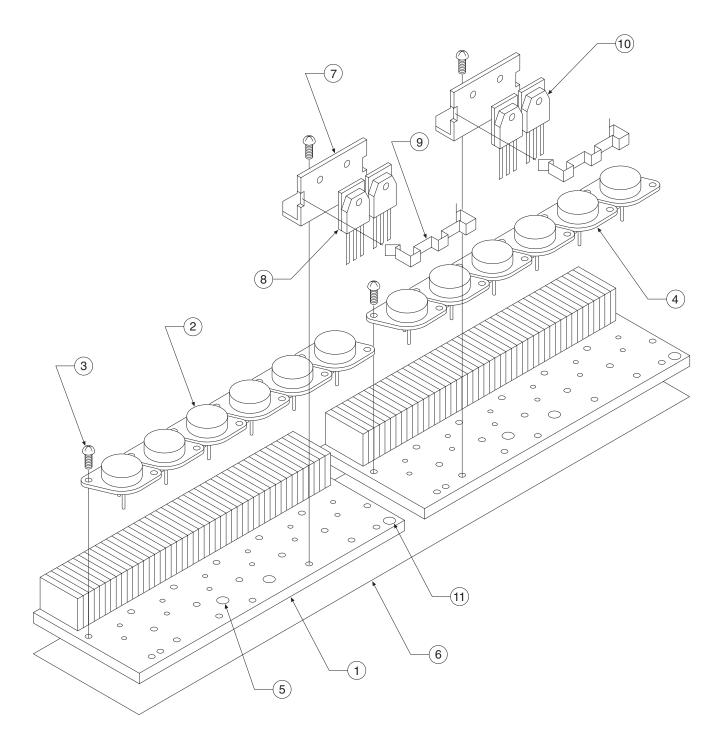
Com-Tech 810 & 1610 Heatsink Assembly
